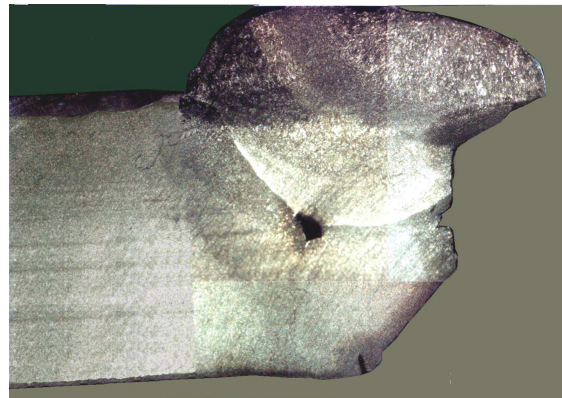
The macrostructure of fractured weld joint shows a big pores in the middle of the joint, 2 % Nital & 7 X
